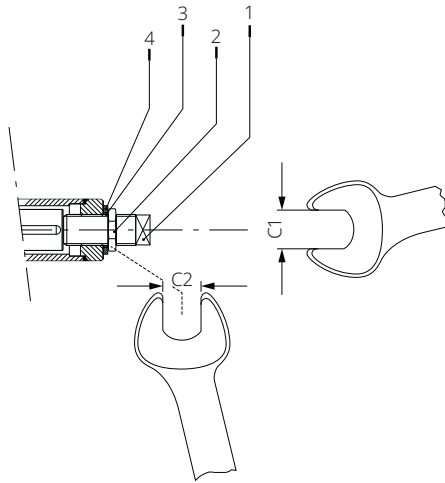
Mechanical Stop at the End Flange of Manual Override (1)
